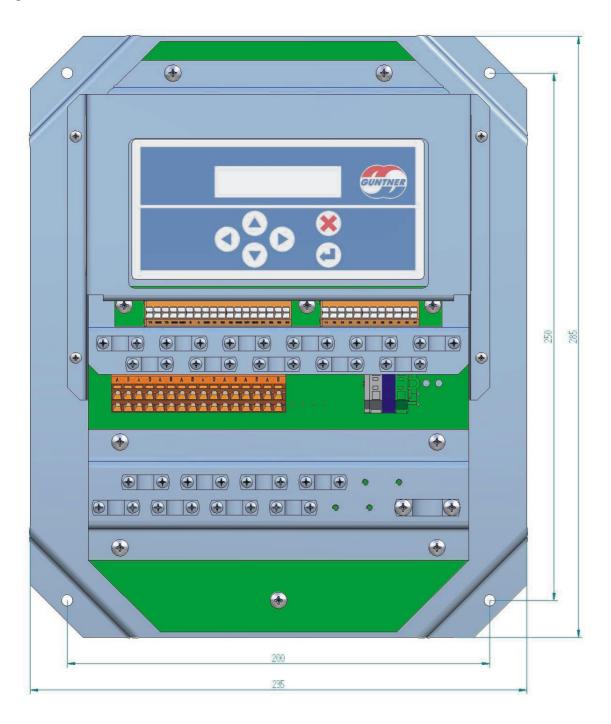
GMM EC/01 /04 /08 UL housing dimensions
